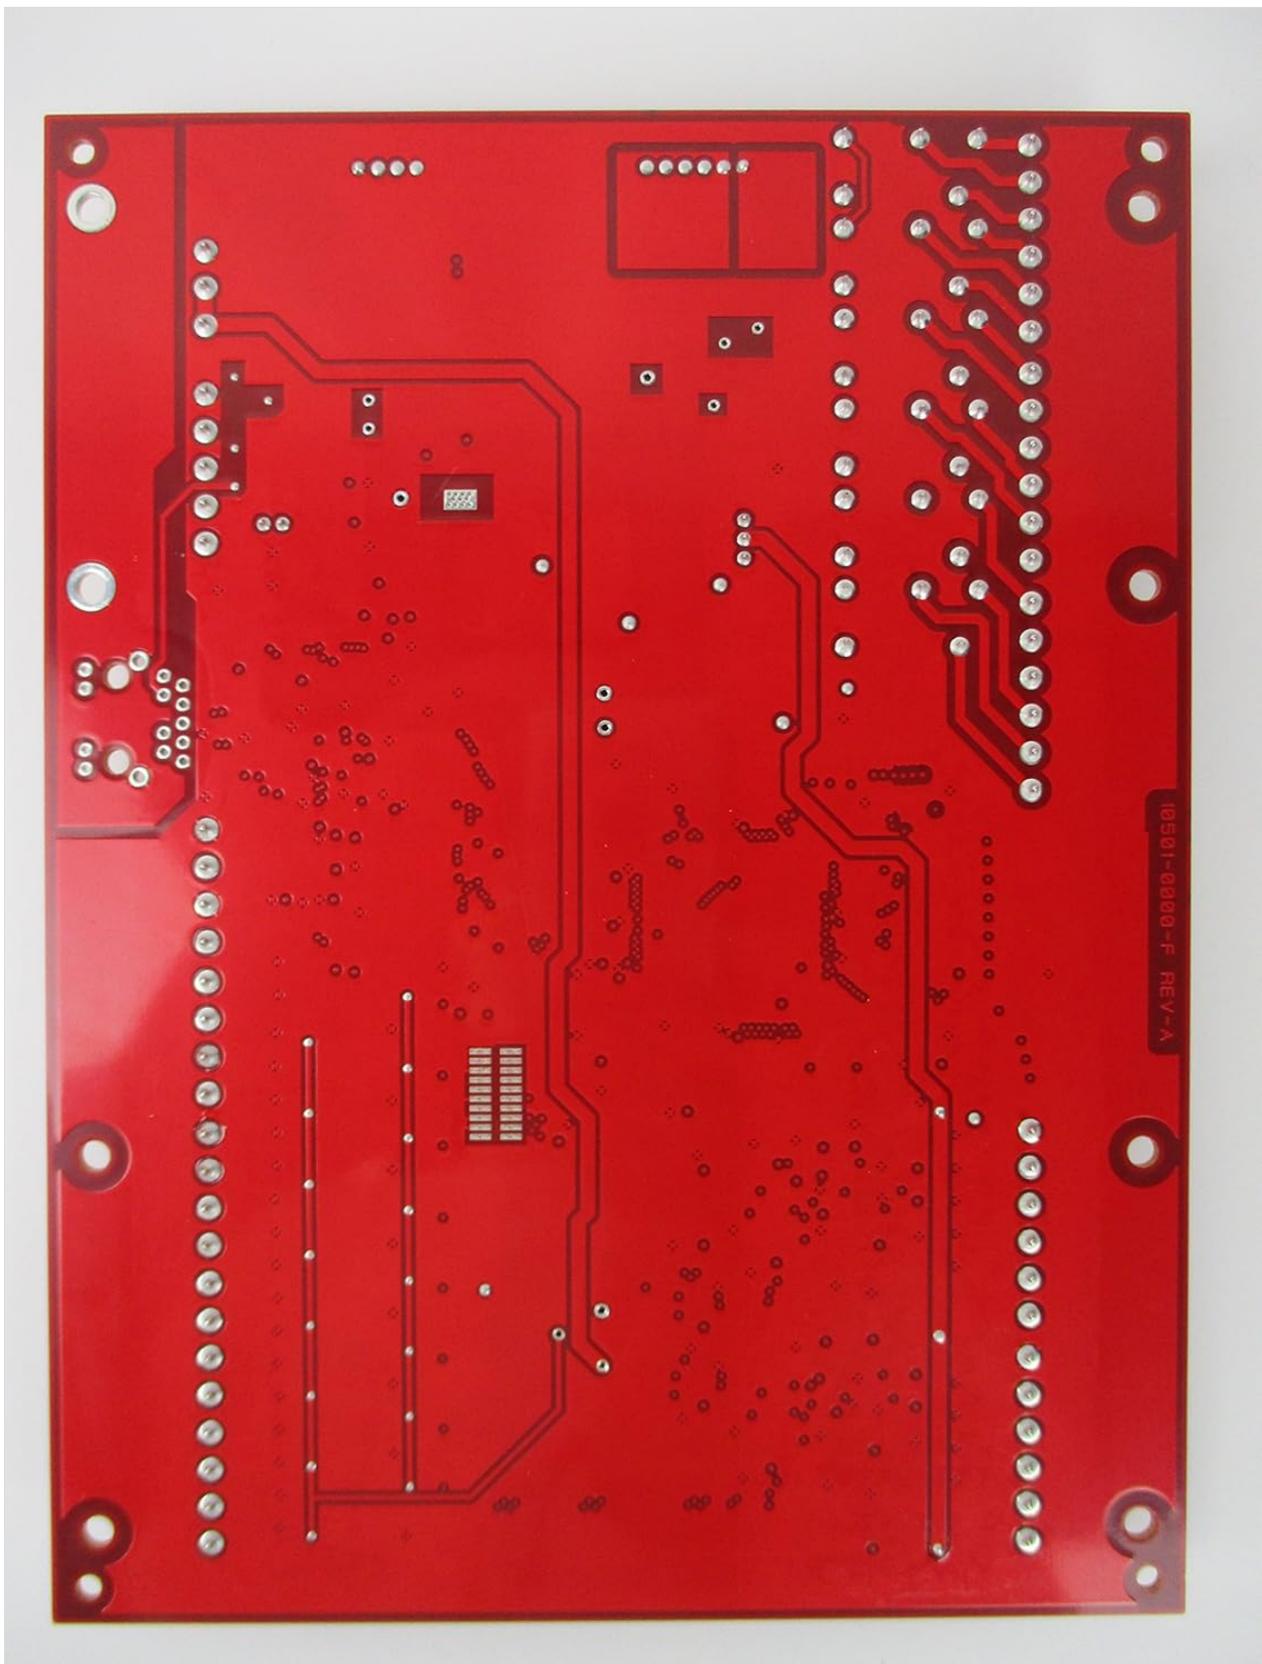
Back view of the LNL-1320-S3 circuit board, illustrating the solder points and circuit traces.
